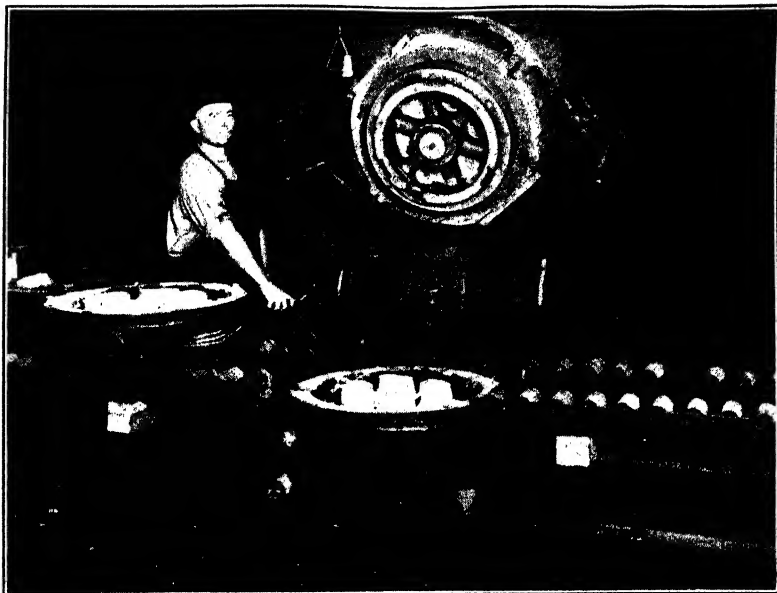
JOLT-SQUEEZE-STRIPPER
